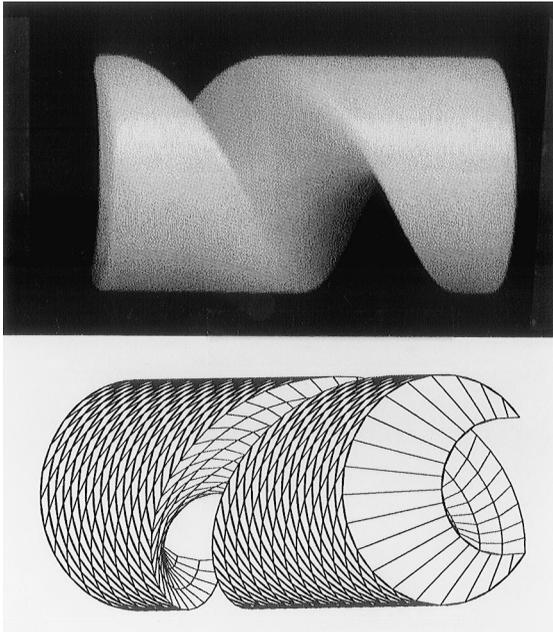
Helical wire support. The top is a picture and the bottom is an autocad drawing.
